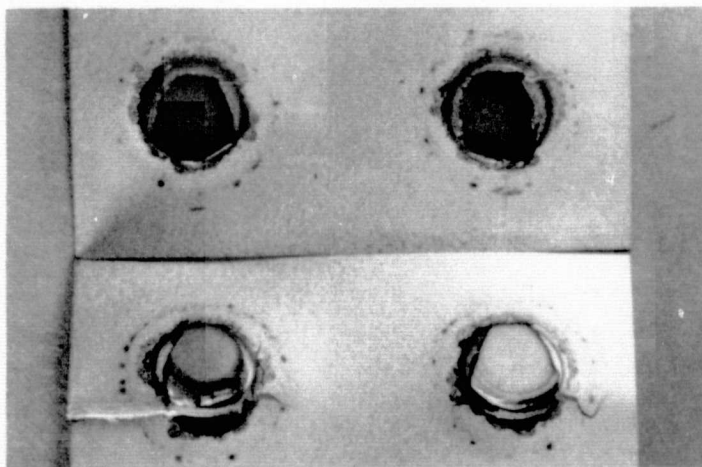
Faying Surfaces of Primed Specimen (Close-up view of primed specimen after testing showing partially carbonized, brown resin spots in the heat affected zone around the weld.)
